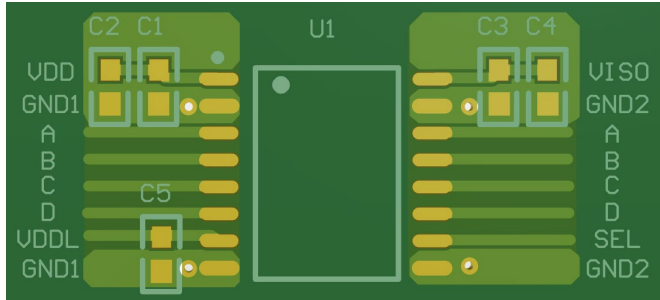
SOW16 Recommended PCB Layout — Top Layer
